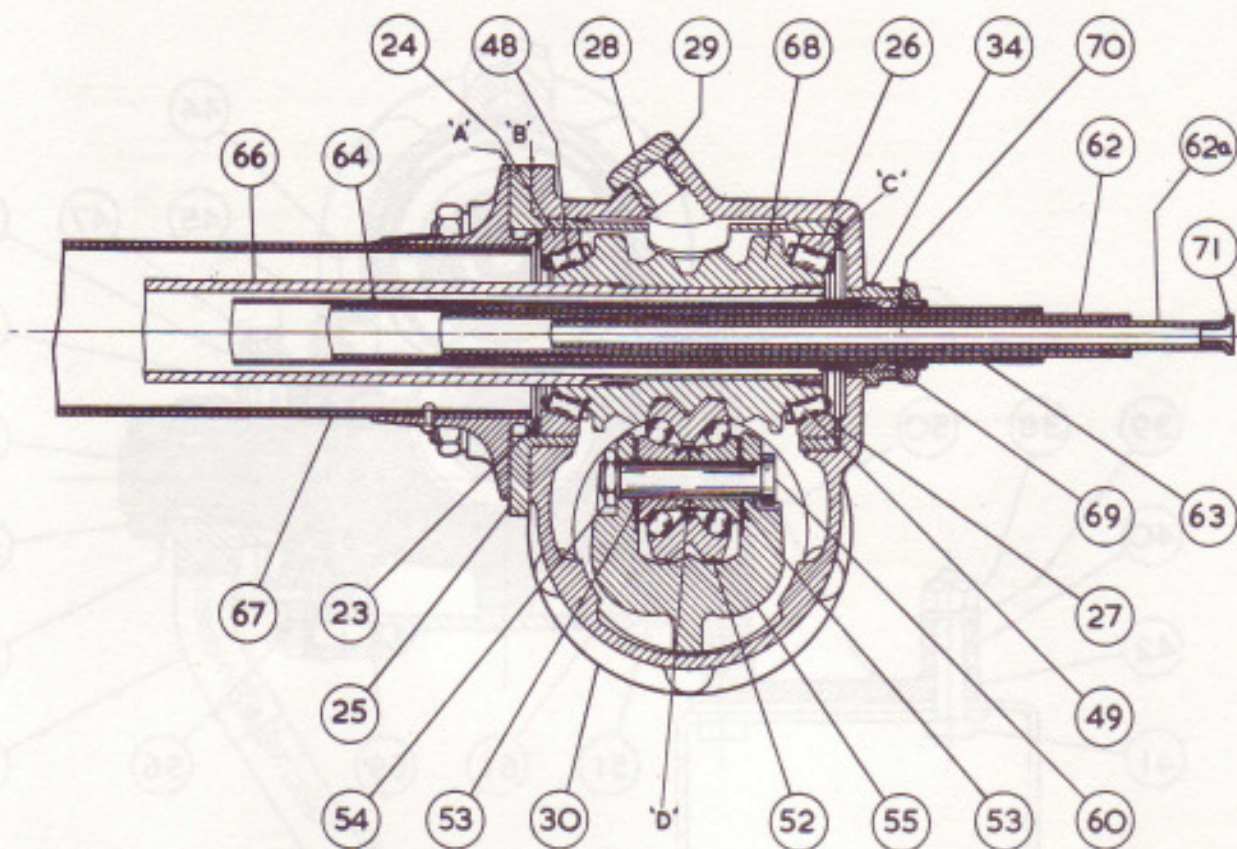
SECTION THROUGH CAM AND ROLLER.
